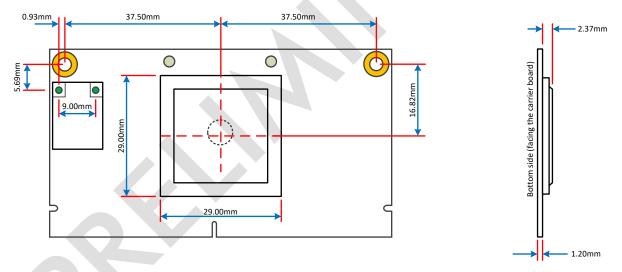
Mechanical position of i.MX 8 SoC (top view)
